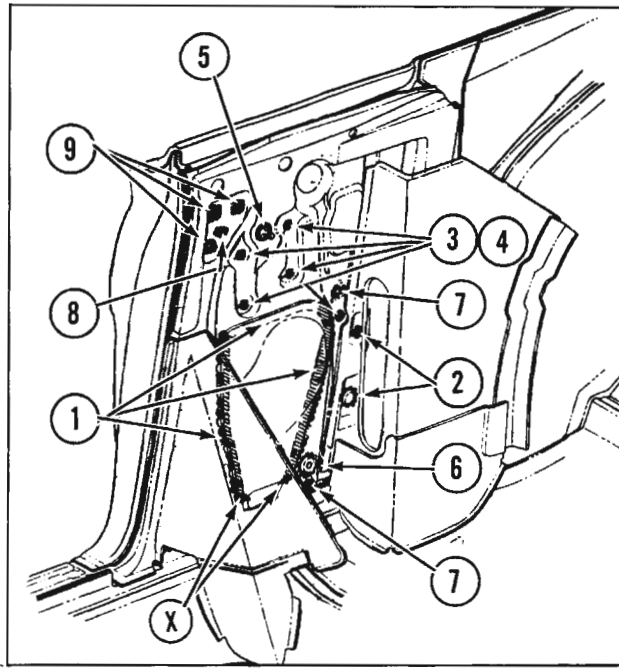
Inner Panel Sealing ("67" Styles)
